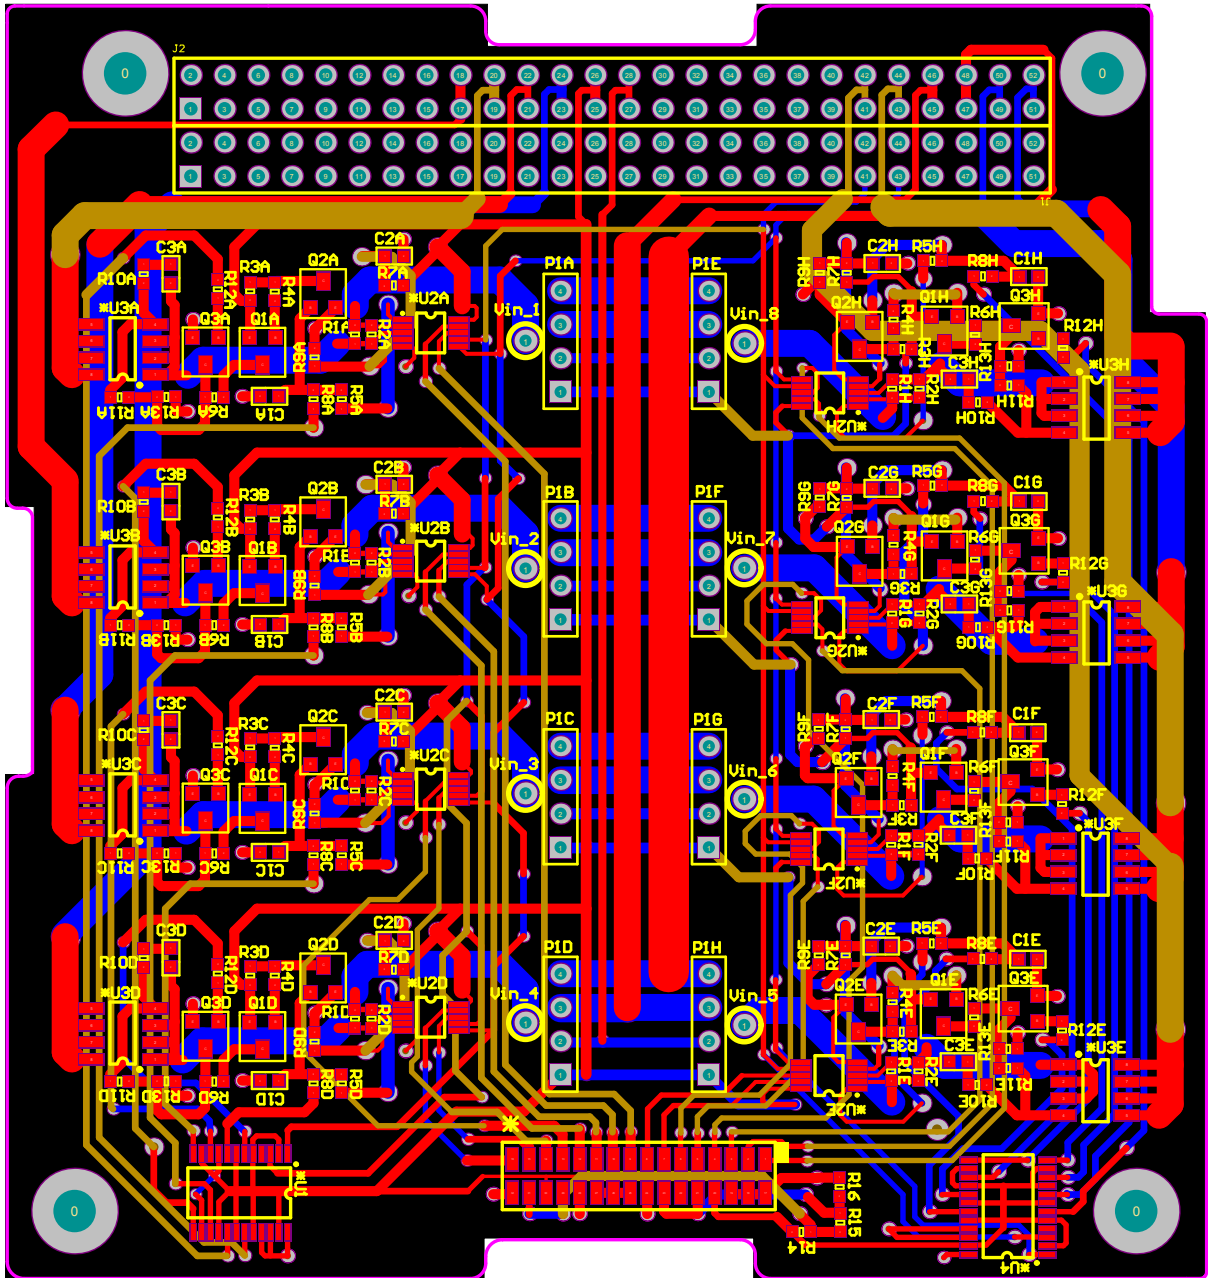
Altium DXP final PCB layout of PDM sent to TRAX for prototyping.
